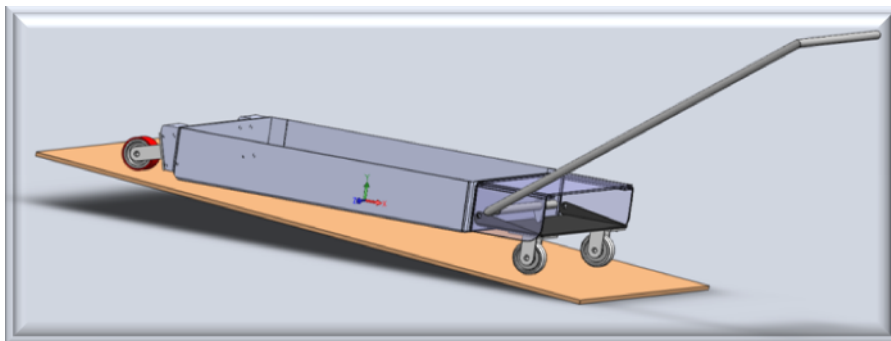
Cam engaged on alpha design of wheel locking mechanism
